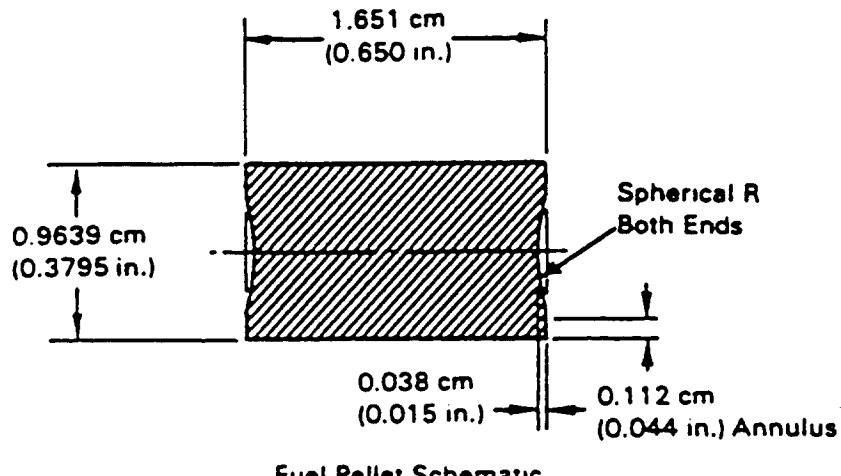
ATM-106 Pellet and Fuel Rod Dimensions
